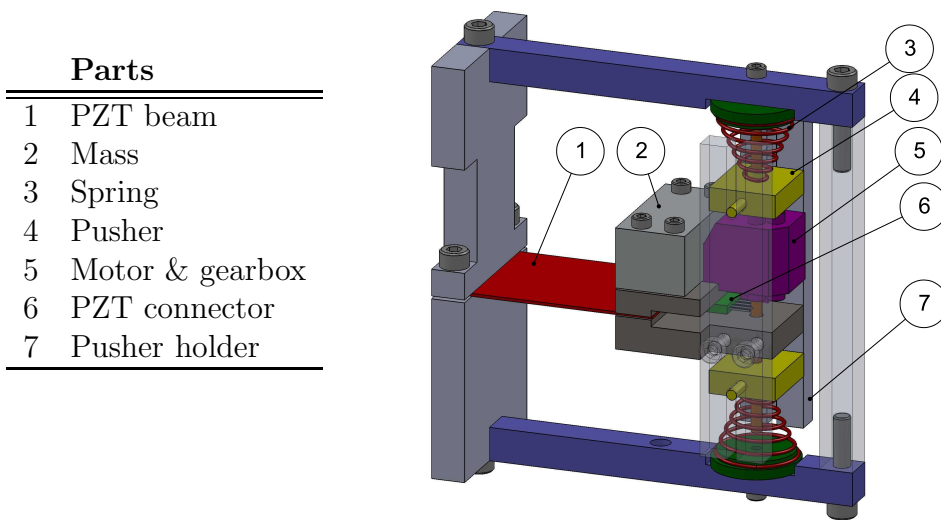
3D Model design of a motorised semi-active tuning prototype. The motor, gearbox, pushers and all necessary electronics are part of the proof mass.
